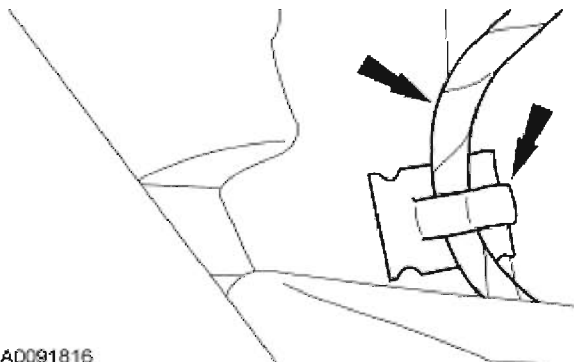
Identifying Fluid Cooler Tube Aside
